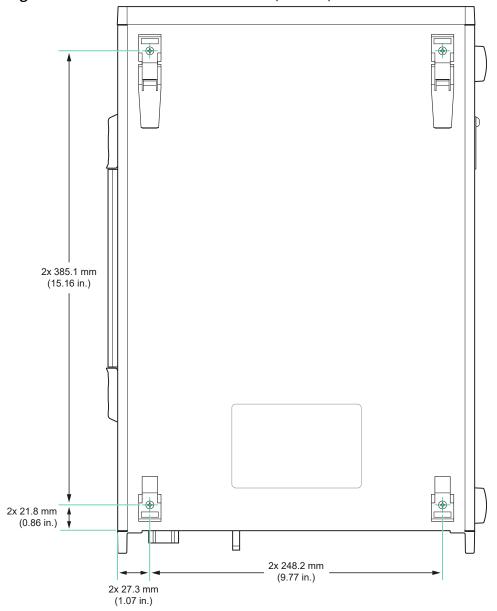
PXIe-1092 Chassis Dimensions (bottom)
